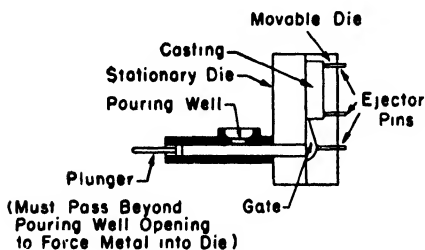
Sketch of cold-chamber pressure machine. The plunger, cylinder, and die carriage are parts of the same machine. The melting pot and metal container are separate.
